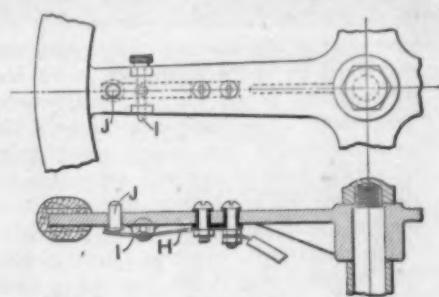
STEERING WHEEL CUT-OUT SWITCH.
